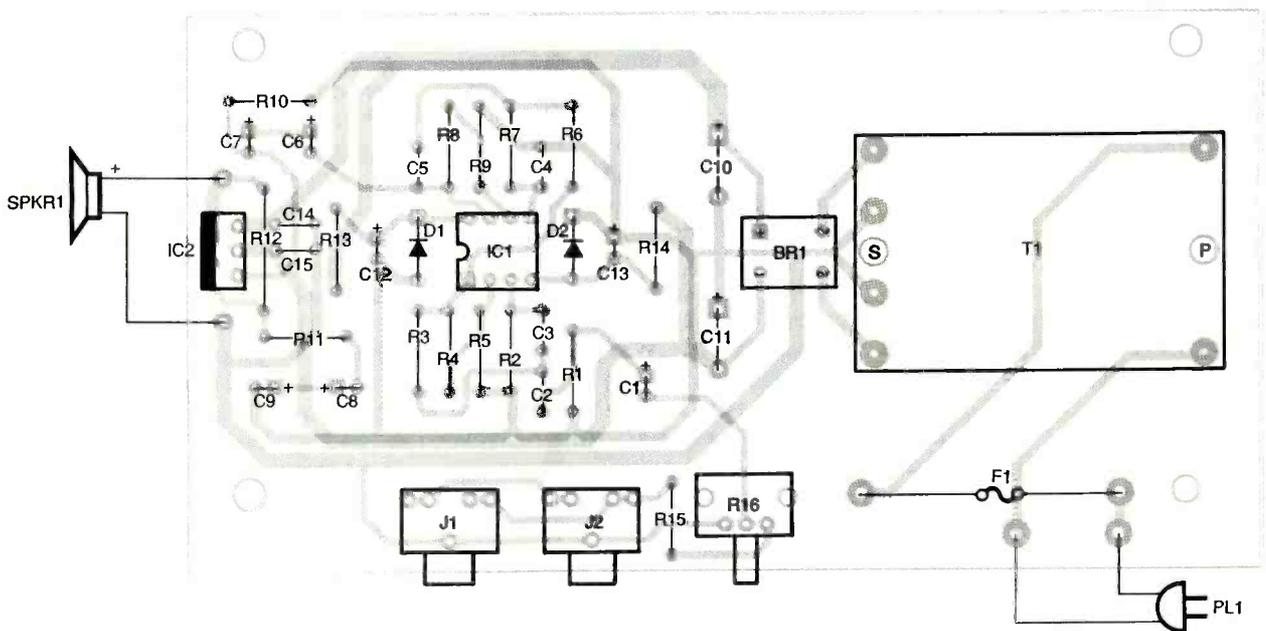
Building the Subwoofer circuit on a PC board is recommended. Use this parts-placement diagram as a guide when doing so.
